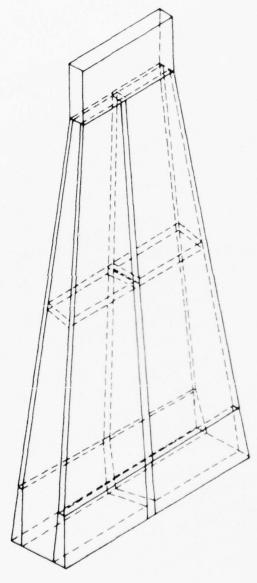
Box-Beam Design with Continuous Single-Sided T-Welds
